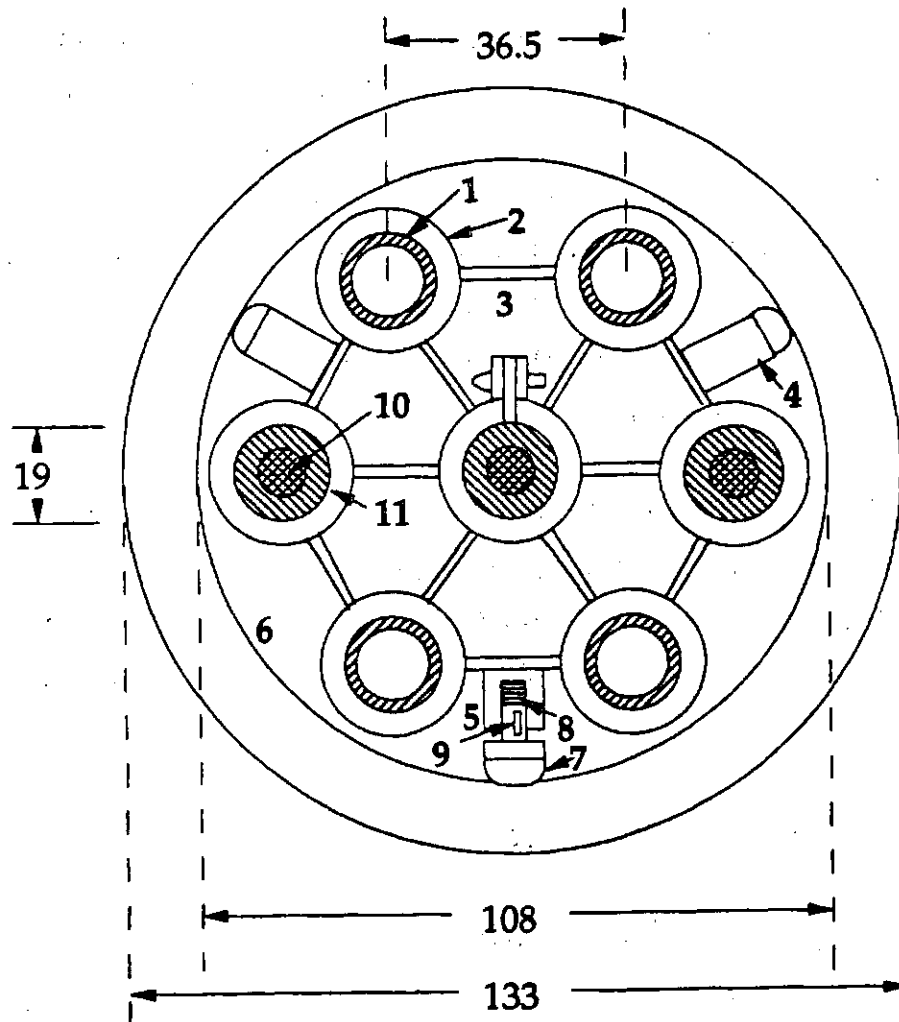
A sectional top view through the center of the probe bundle comprising of seven simulated heat transfer probes arranged in an equilateral triangular configuration. (1) heat transfer probe, (2) ring clamp, (3) spacer plates, (4) locating stud, (5) telescopic locating stud, (6) column surface, (7) Teflon rounded cap, (8) stainless steel spring, (9) locking pin, (10) calrod heater, and (11) brass tube.
